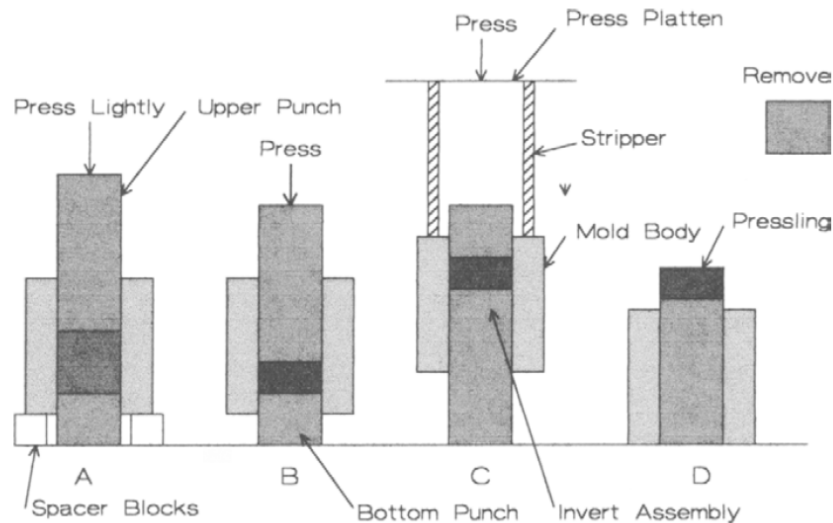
The four die stripping steps: A. Fill die and insert top punch - B. remove shim press - C. Invert die and position stripper on top - D. Press body out of die (Thompson 1981)
